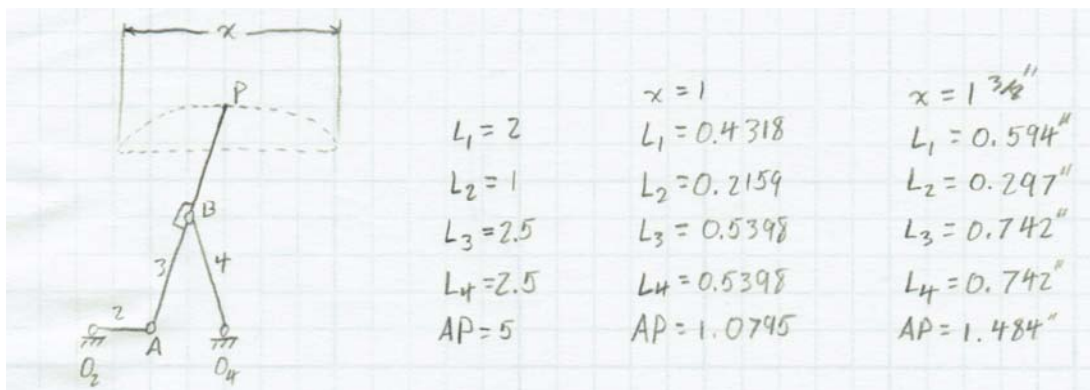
Hand sketch of an initial idea for a four bar design. Design would be a path generation mechanism that would drag the card out of the card shoe and into the rollers.
